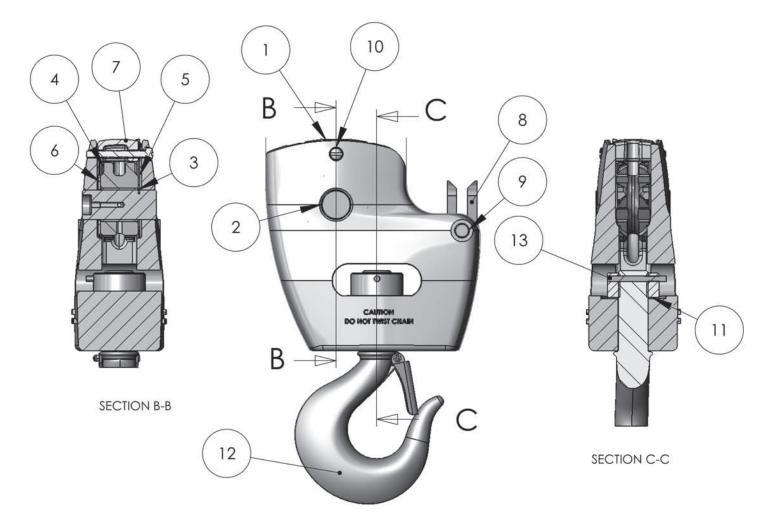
G. LOWER HOOK BLOCK ASSEMBLY 1/4 TO 1 TON
